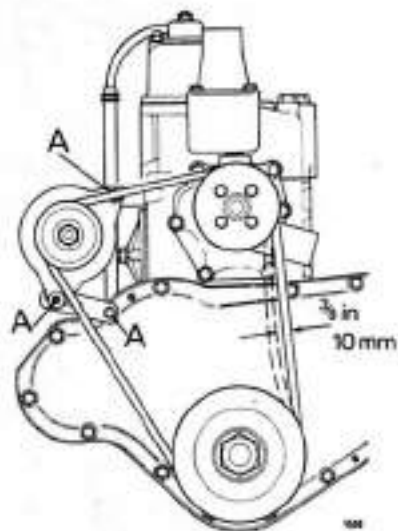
/5. FAN BELT DRIVE ADJUSTMENT
